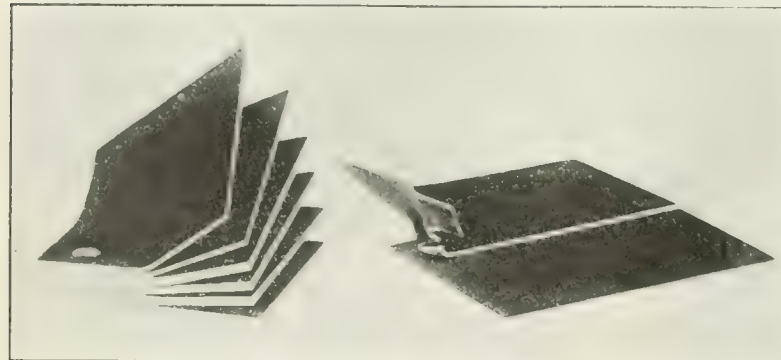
Six Sheets Electrically Welded; Proof of Fusing.
